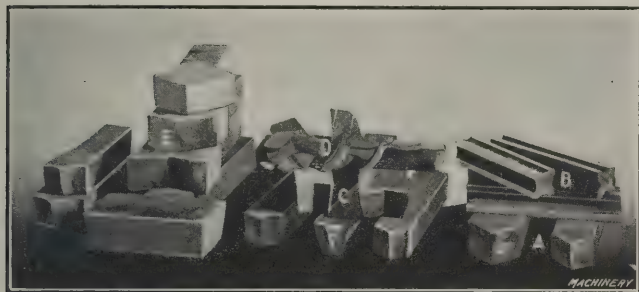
Tools used in Turning Chilled Cast-Iron Rolls
